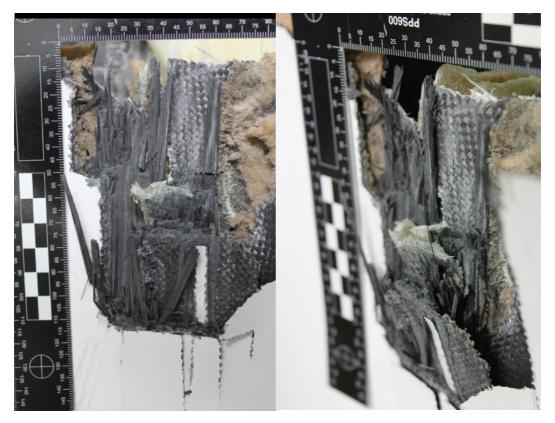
Upper wing spar from the right wing section, illustrating significant longitudinal splitting, translaminar fracturing, brooming and material loss (Source: Author)
